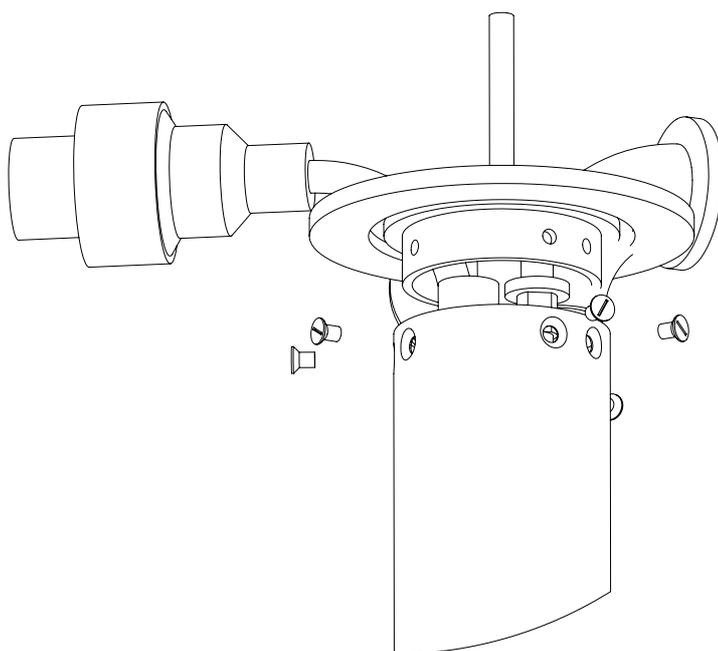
In this view, components are magnified to show how the insert is assembled. The CFT fits over a lip on the upper flange. Sunken M3-sized machine screws are connected through the holes on the CFT to the threaded holes of the upper flange, securing both components in place.
